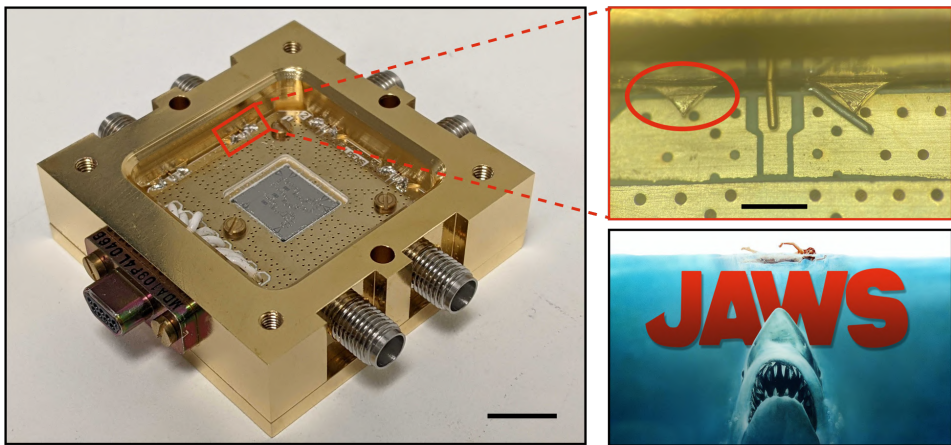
JAWS. Left: picture of the JAWS package, without its cover (picture courtesy of Samuel Deleglise). The black bar scales 10 mm. Red inset: close up on the box-to-PCB interface before soldering. The glass bead pin is aligned with the PCB signal line. The left shark fin is highlighted. A metallic rod is placed near the right one, ready for soldering. The black bar scales 2 mm. Bottom right: Roger Kastel's design of JAWS cover, the novel by Peter Benchley (1974) adapted on screen by Steven Spielberg (1975).
